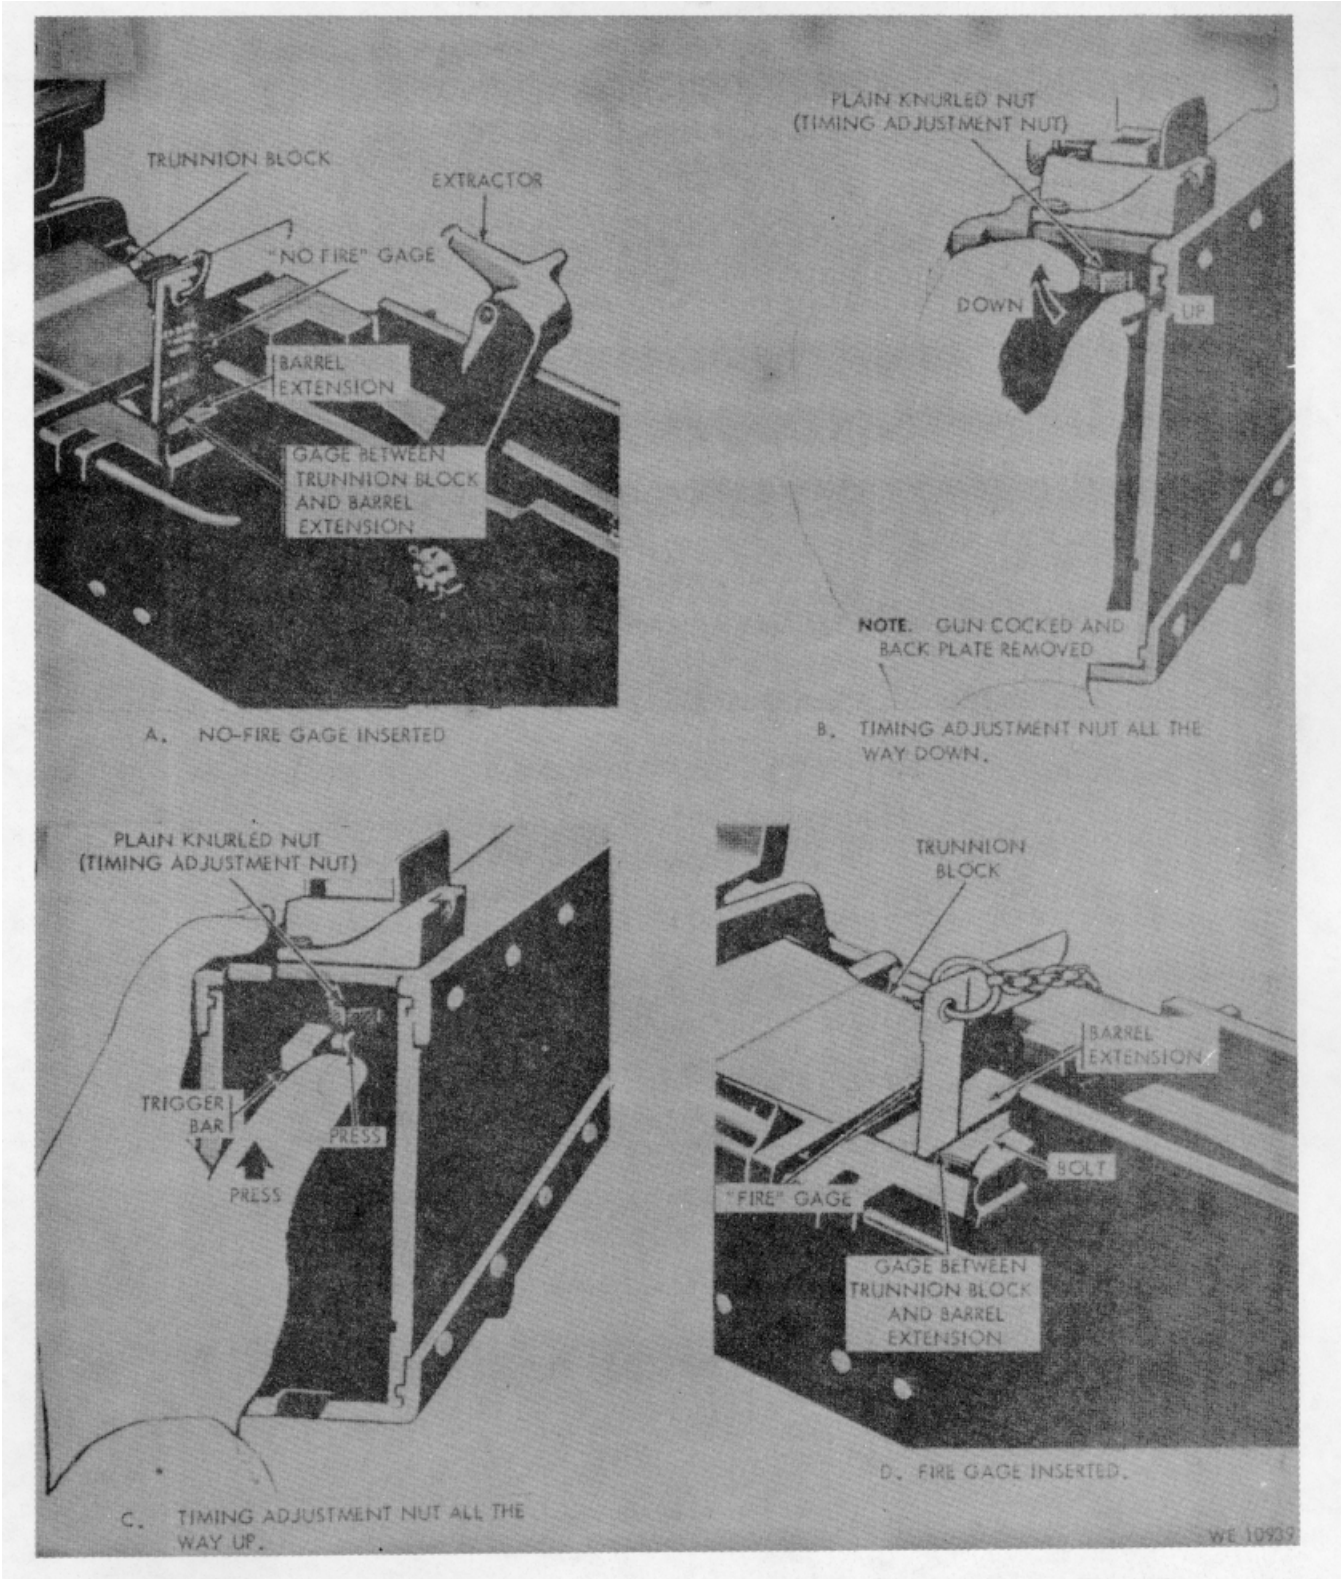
Checking and adjusting timing on cal. .50 machine gun M2, HB
